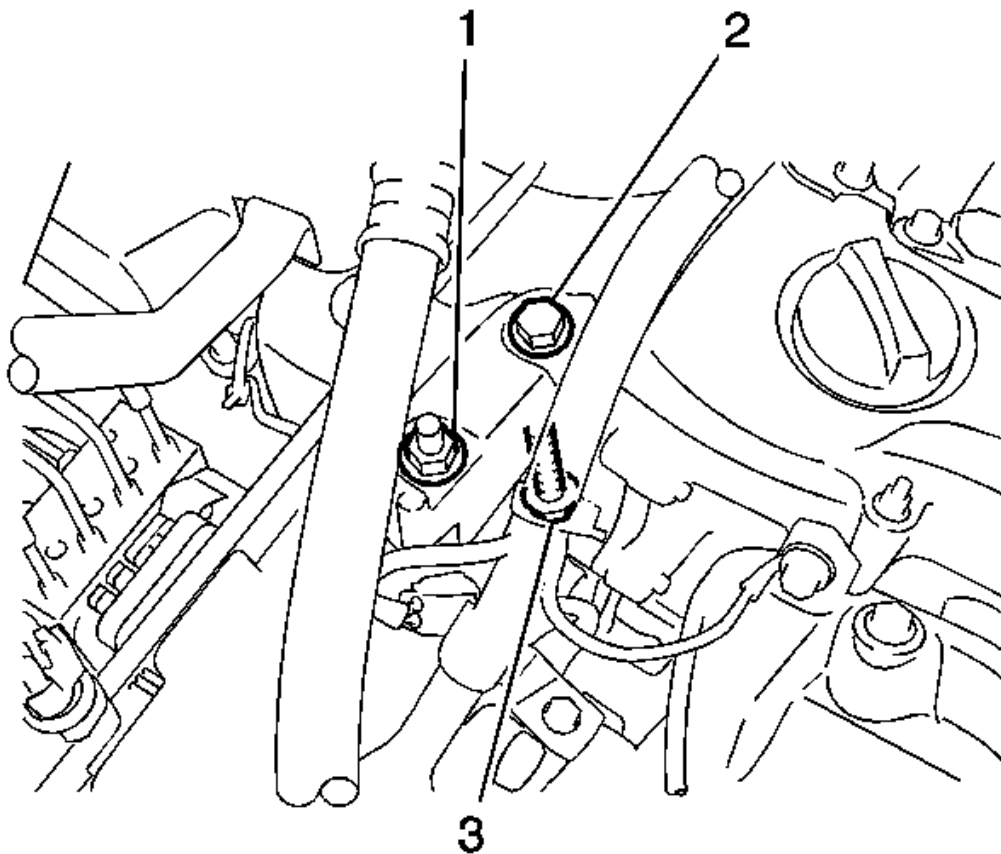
View Of Right Engine Mounting Insulator, Bolt & Nuts
